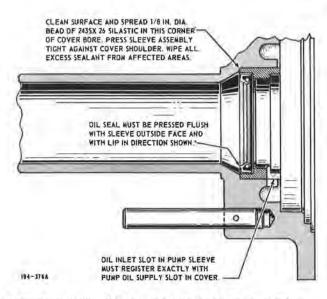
Sectional View of Compound Main Driving Pinion Bearing Cover Assembly
